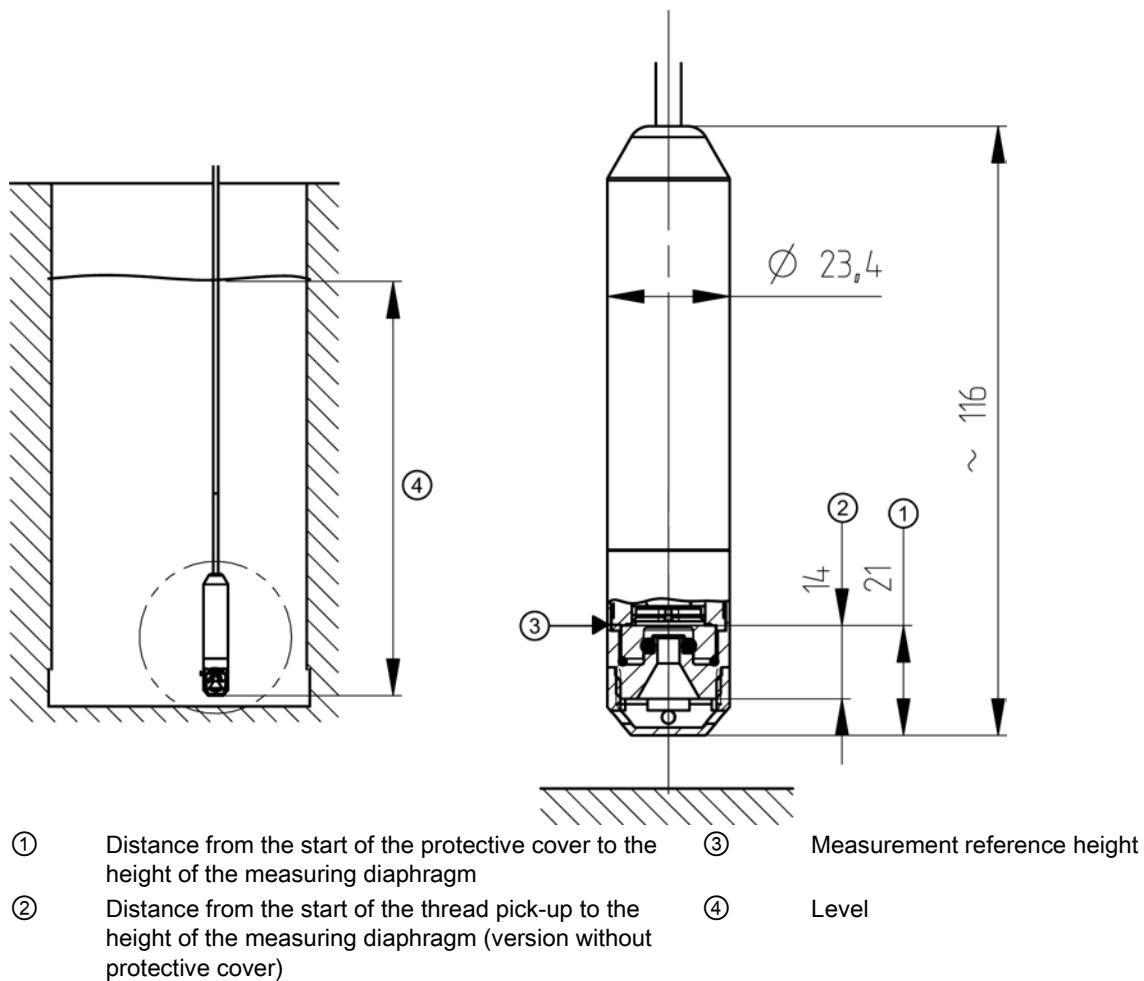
Mounting the pressure transmitter, dimensions in mm
